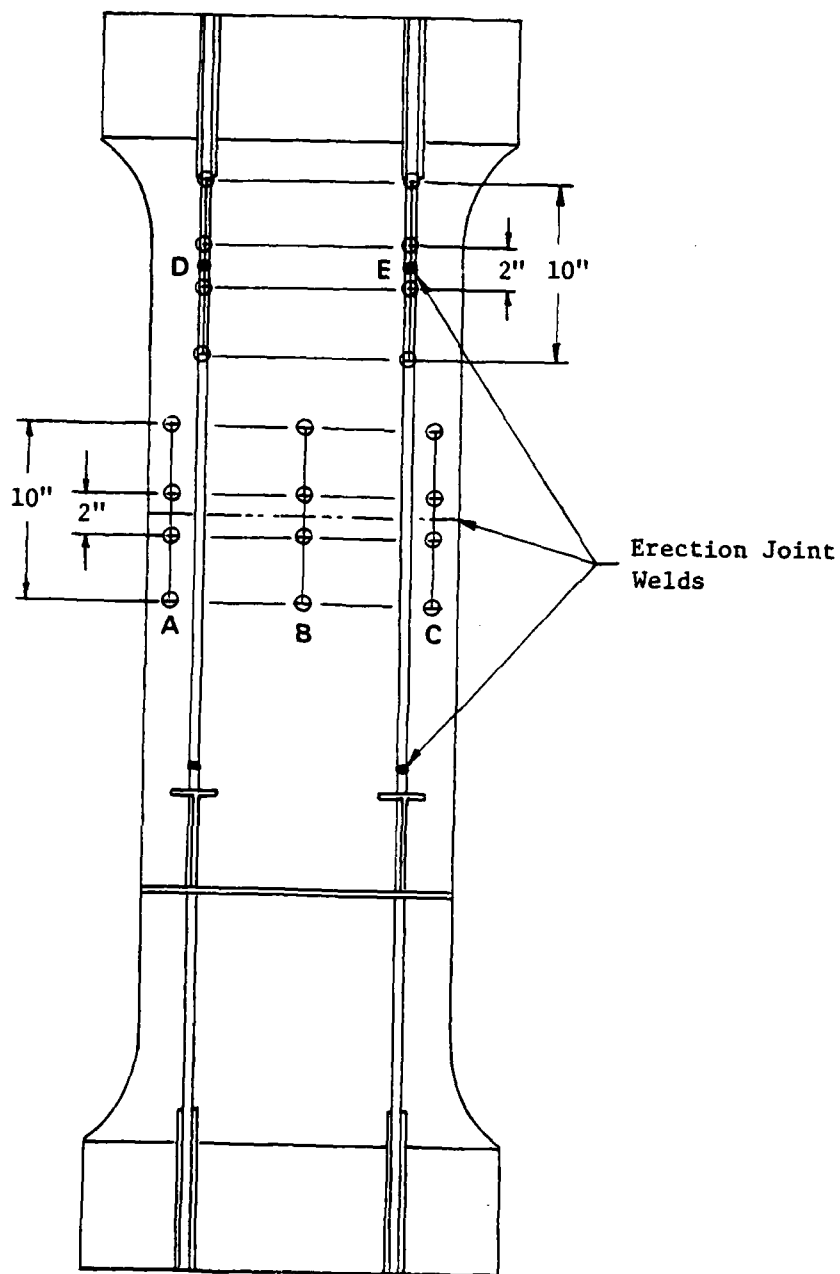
Scribed Gage Mark Locations on Deck/Bulkhead Element Static Tensile Test Specimens
